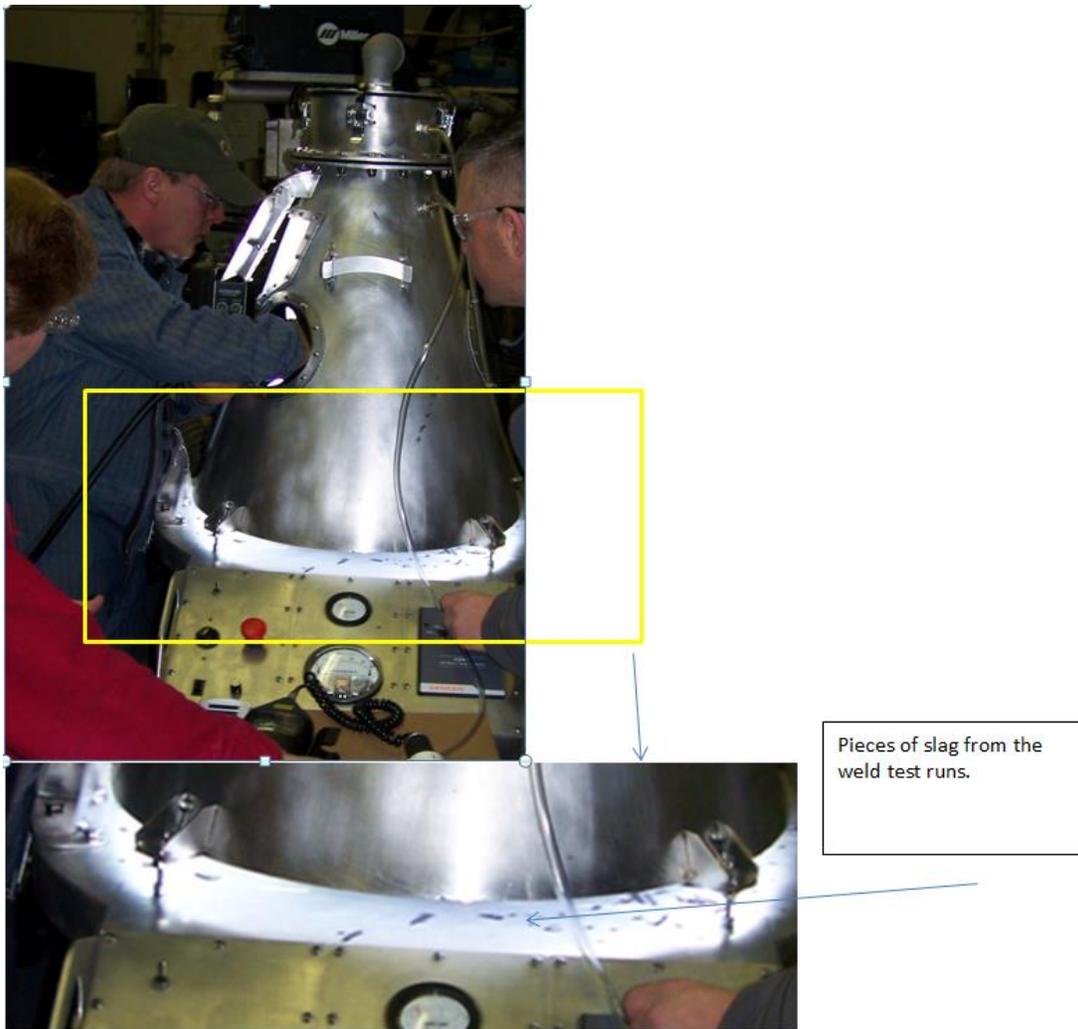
Slag formed from test runs in weld fume chamber.
